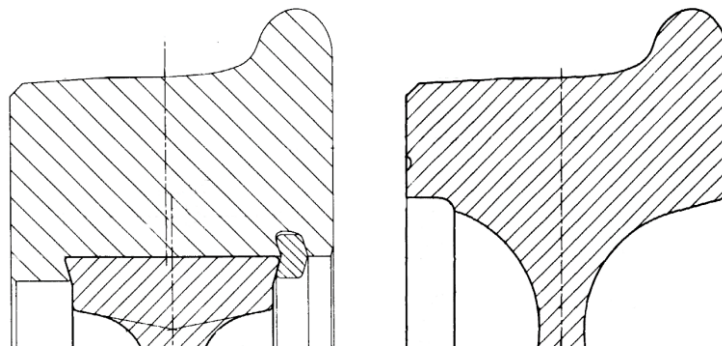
Drawings of a tyred (left) and monobloc (right) wheel with the same external diameter of 940 mm. Tread and flange profile is the same for both wheels.
